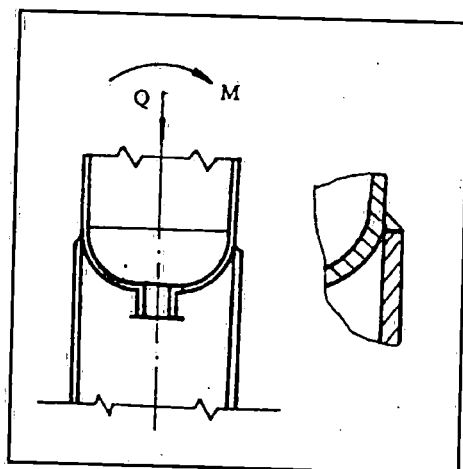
A fillet weld attaching skirt to column
